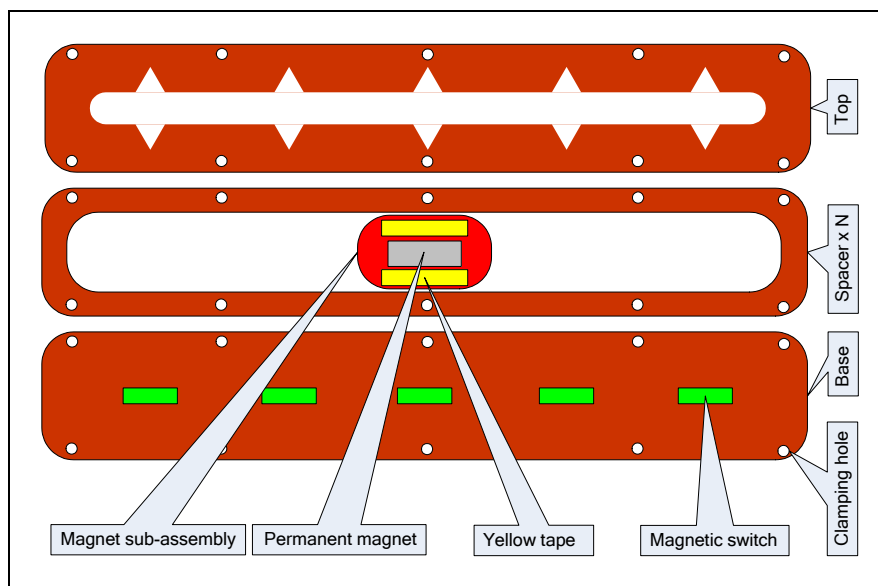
Engineering diagram of the SlideStick slider assembly. The slider mechanism can move horizontally, closing the magnetic switches as it passes over them.
